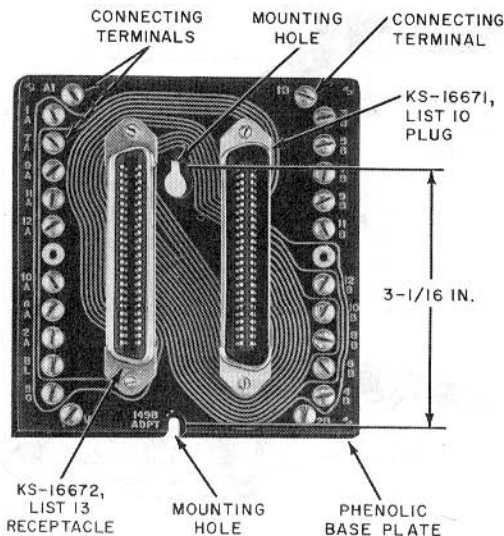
149B Adapter, Printed Wiring Board Assembly
